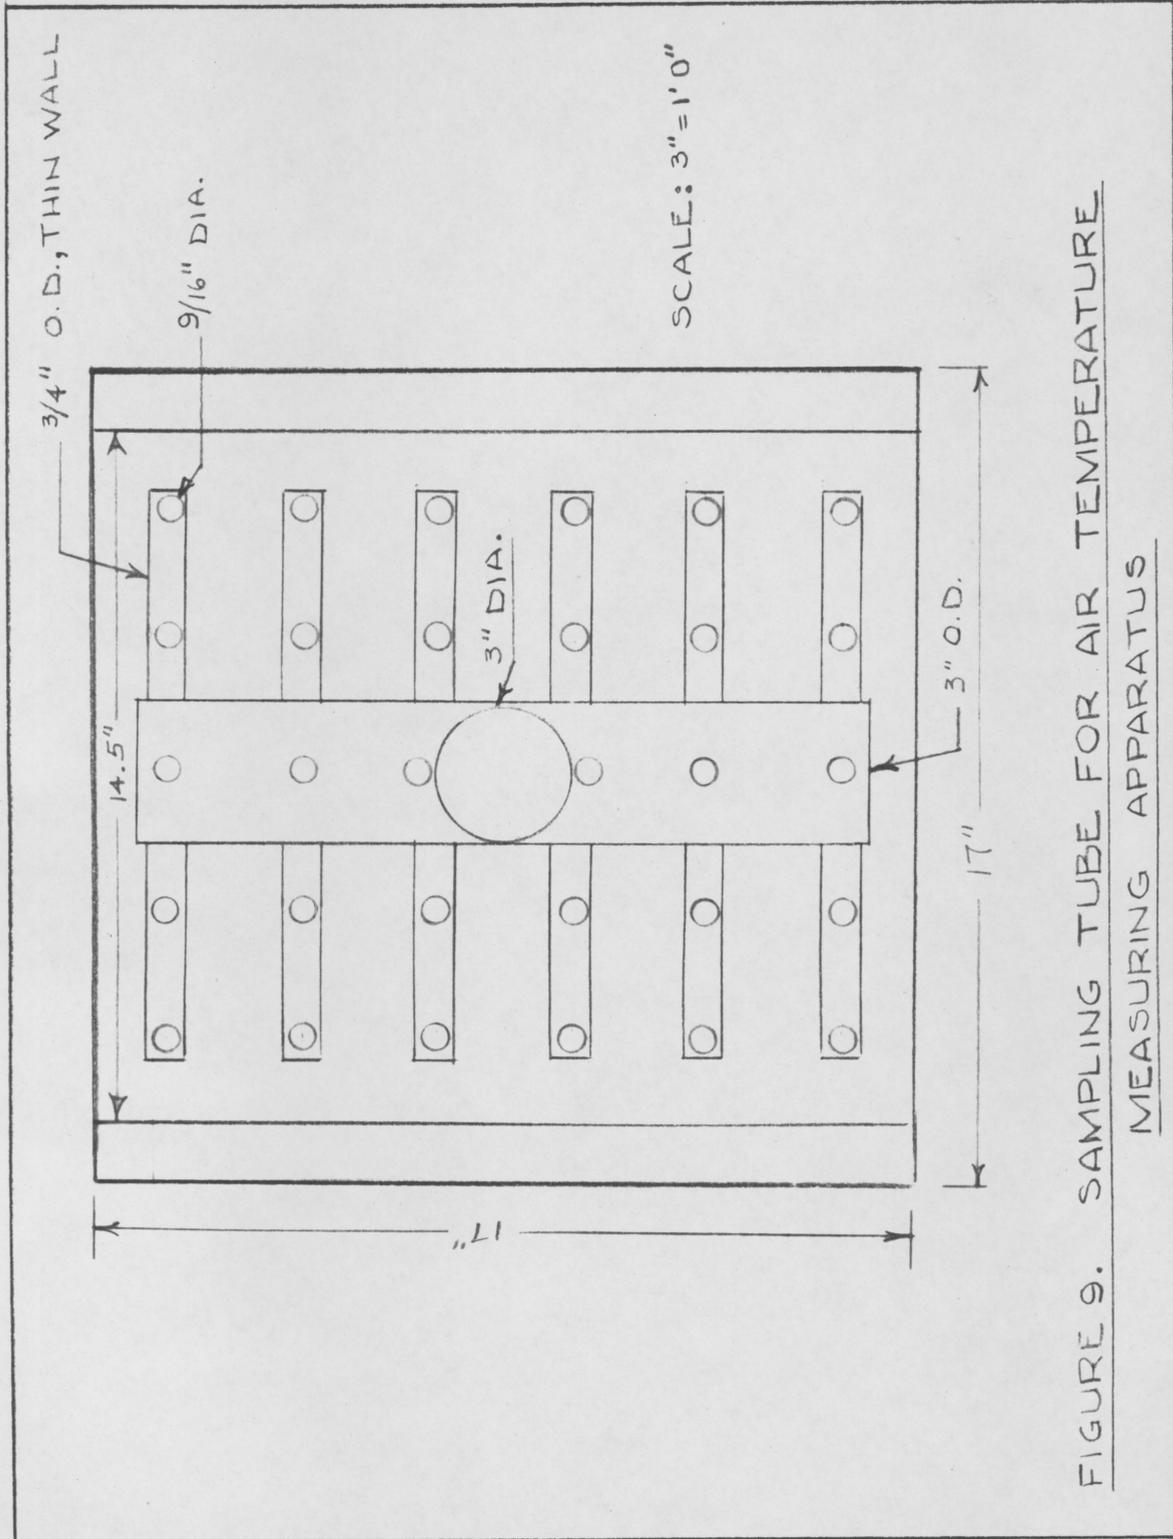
SAMPLING TUBE FOR AIR TEMPERATURE MEASURING APPARATUS
